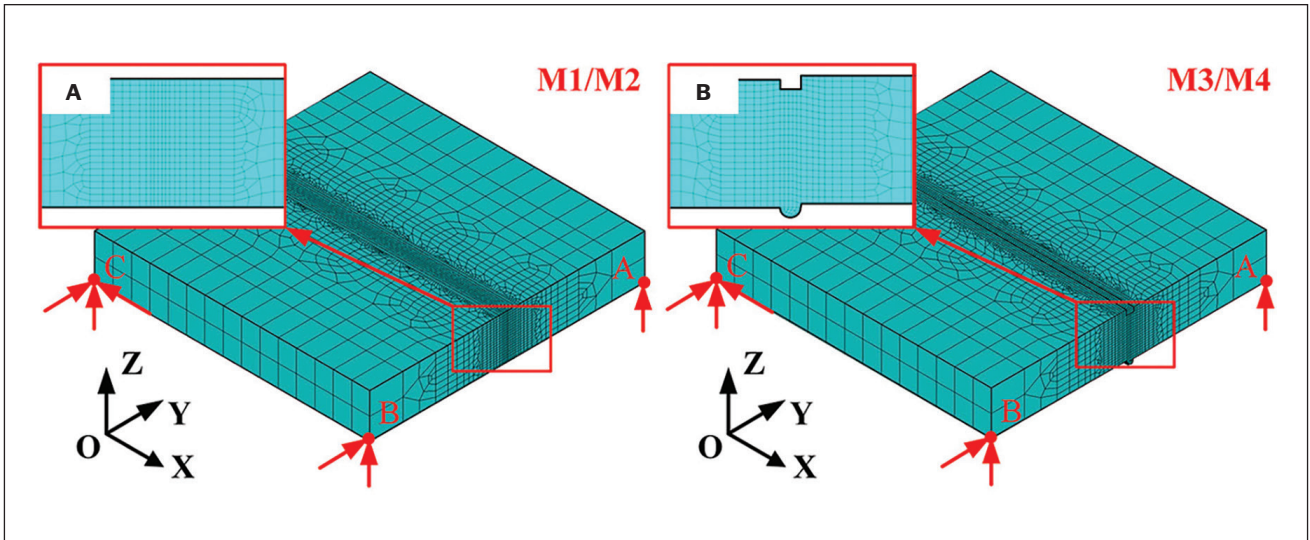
Finite element models: A – Without weld defects (M1 and M2); B – with weld defects (M3 and M4).
